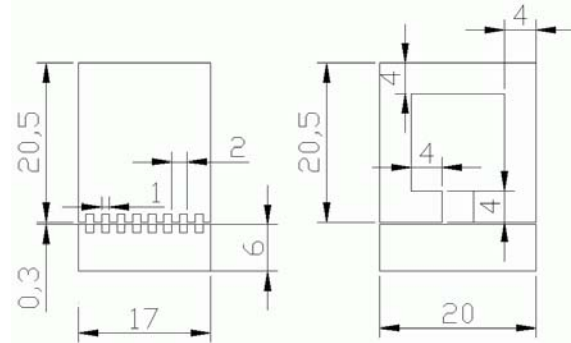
Main sizes of module with enlarged teeth surface: a) lateral view; b) frontal view.
